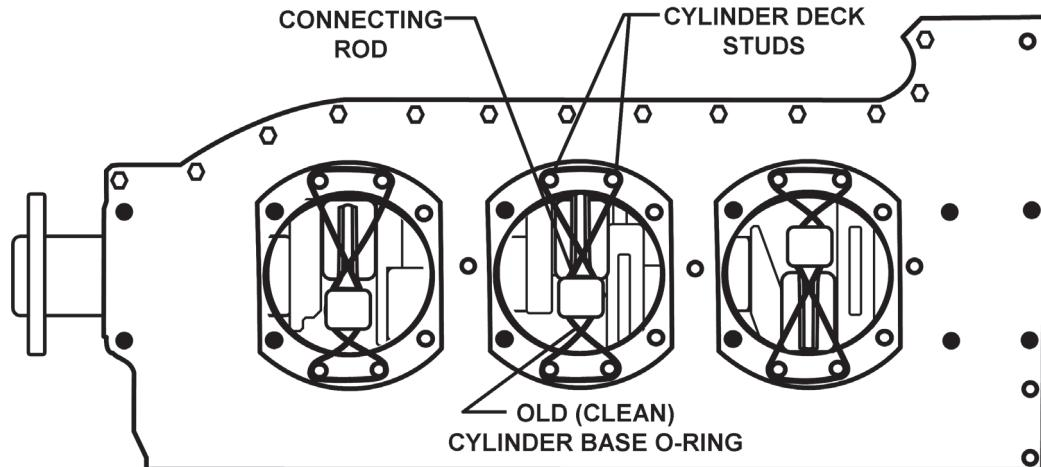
Packing Installed to Stabilize Connecting Rods
